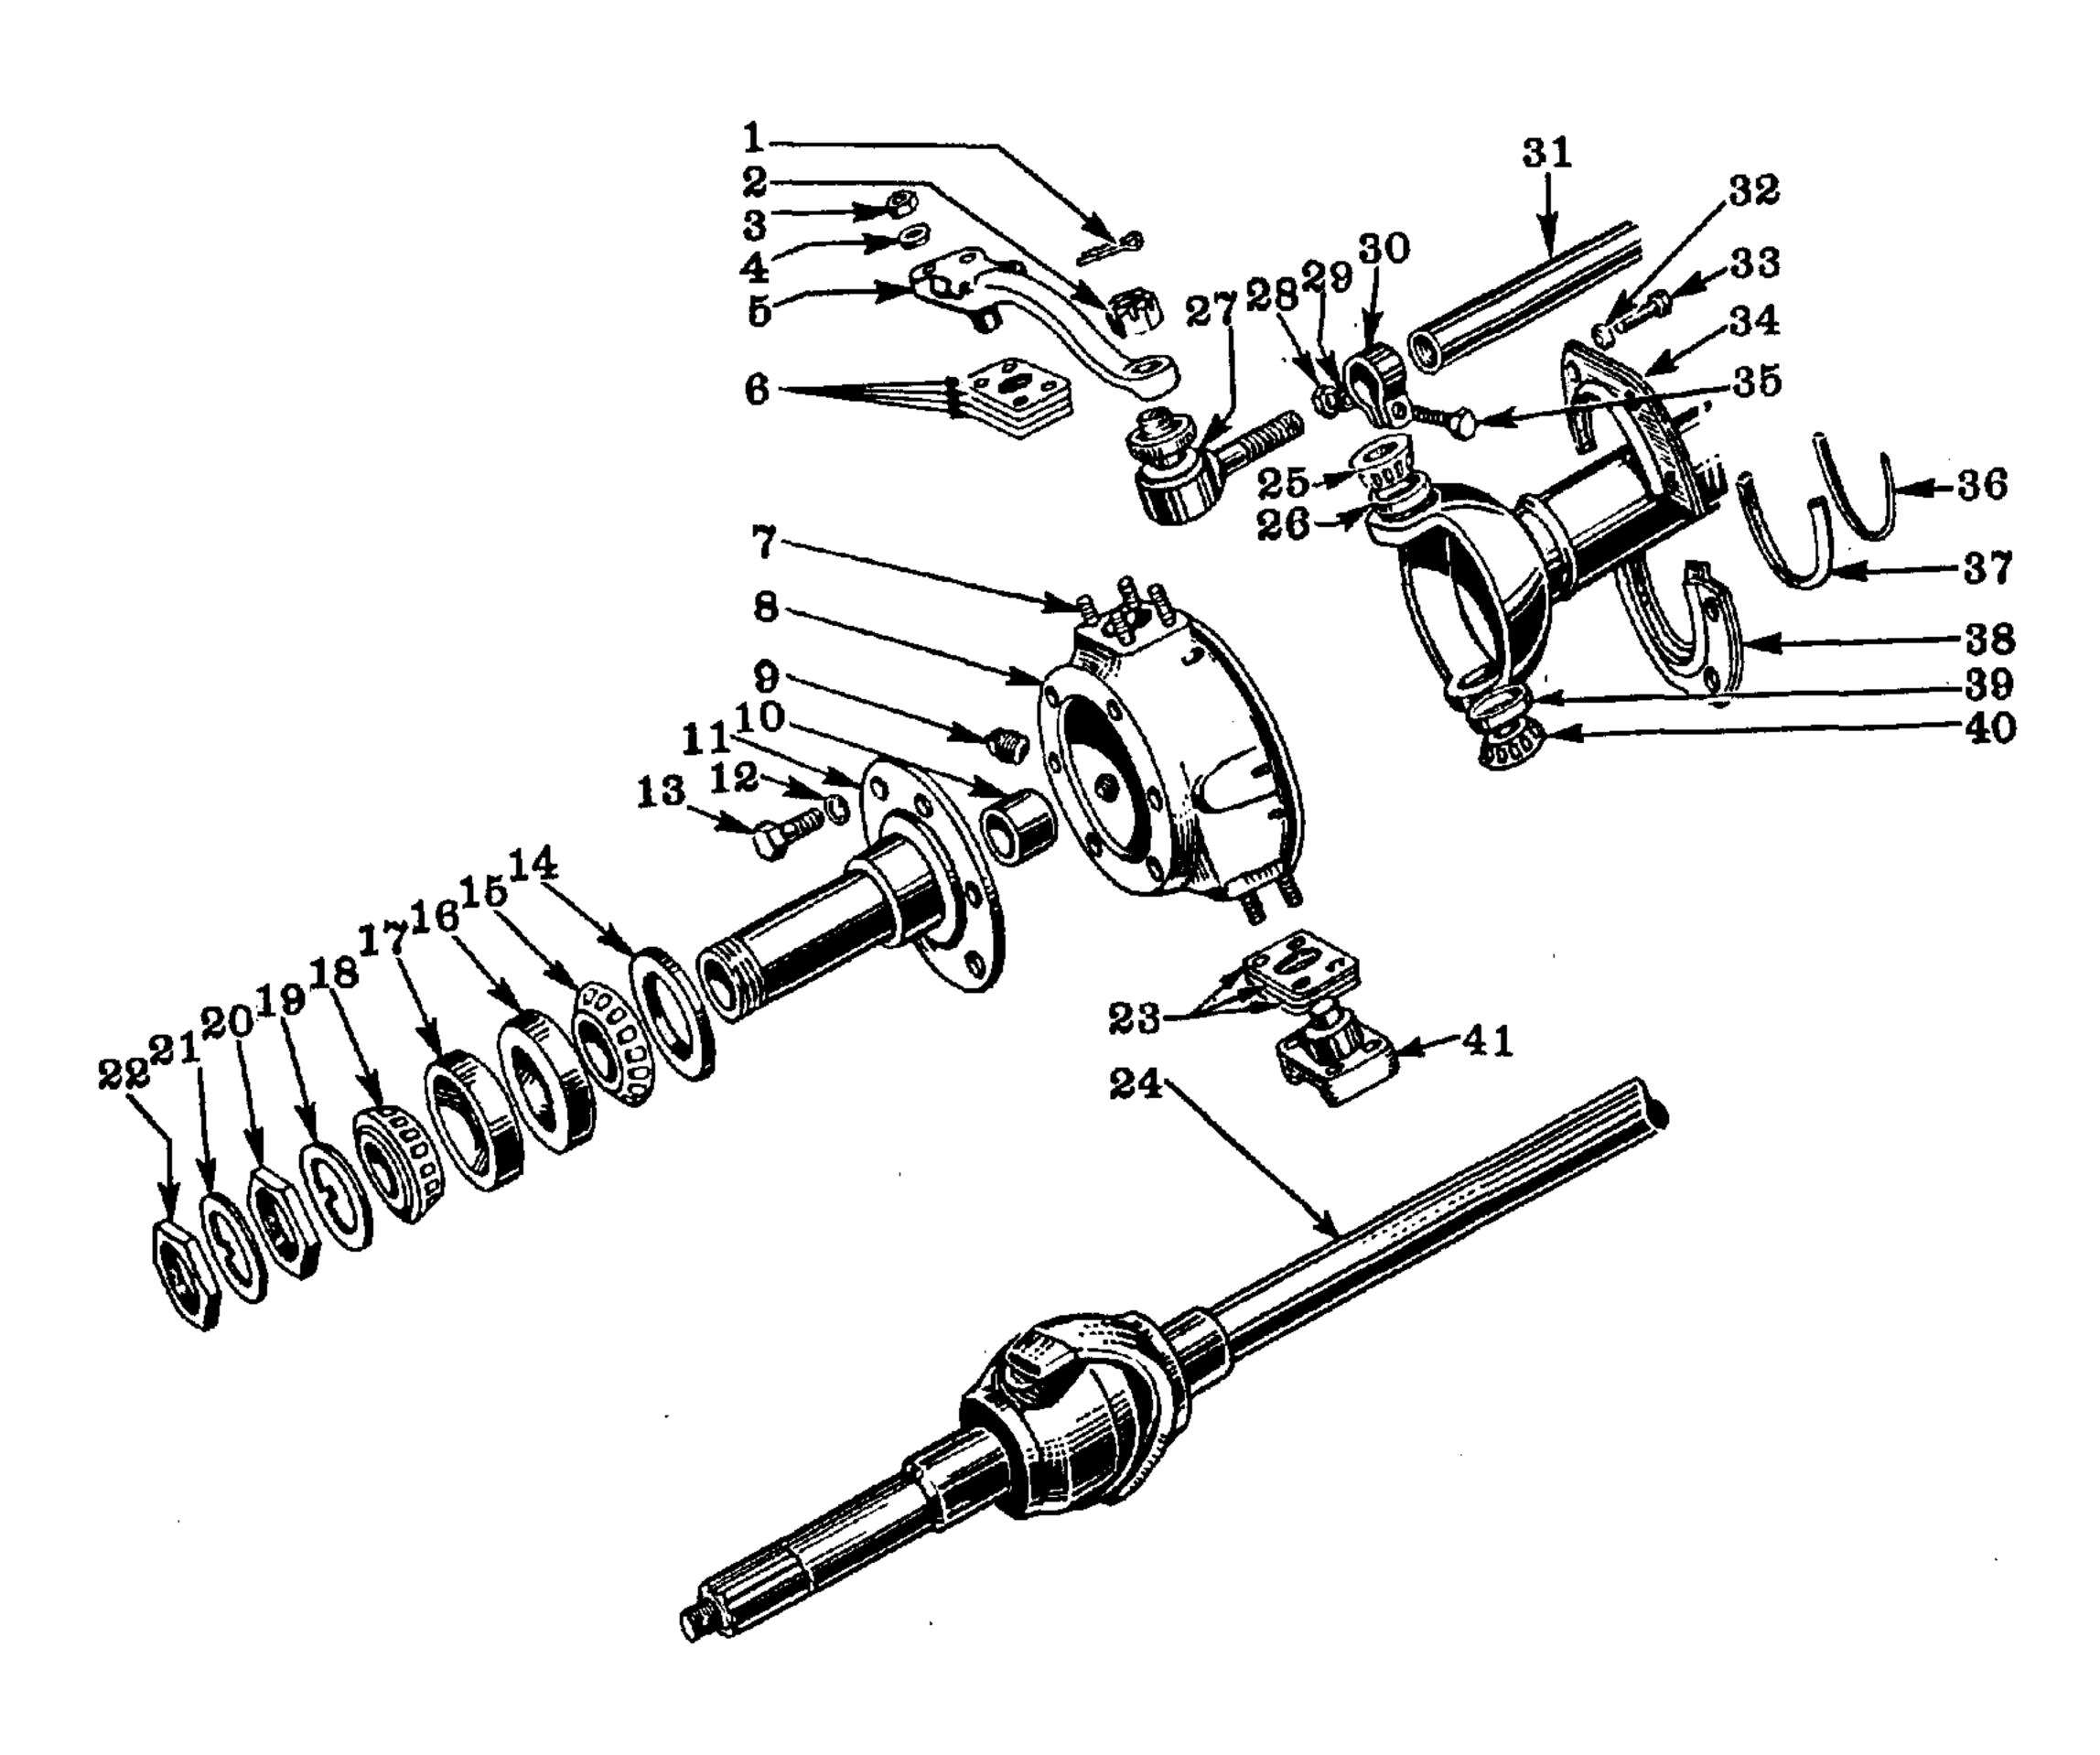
FRONT AXLE, STEERING KNUCKLE AND WHEEL BEARINGS
